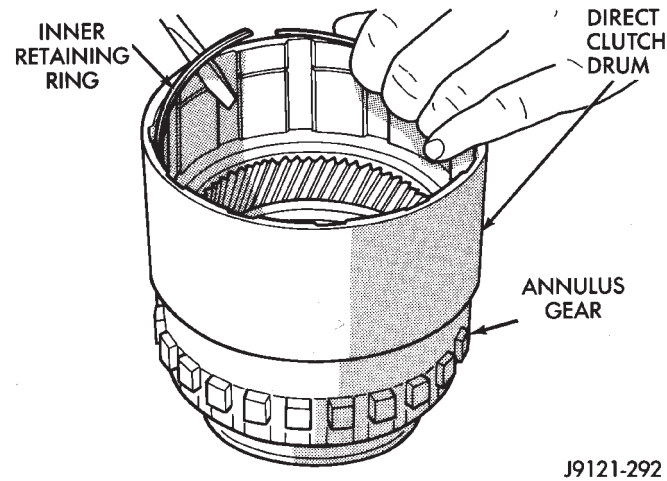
Clutch Drum Inner Retaining Ring Removal
